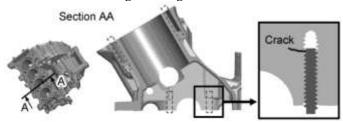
Location of starting point of fatigue fracture at internal thread
